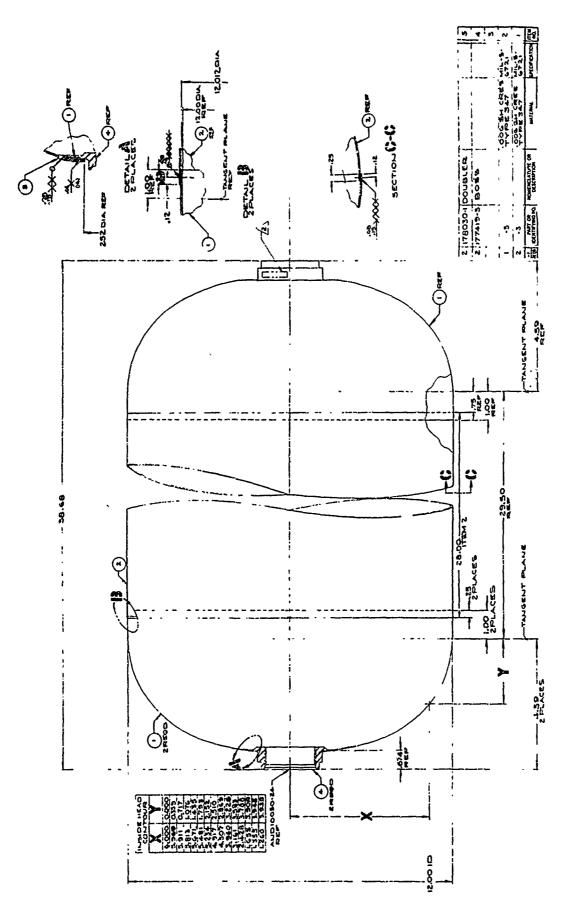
Liner Assembly, 12-in.-dia Tank (Dwg No. 178029)
